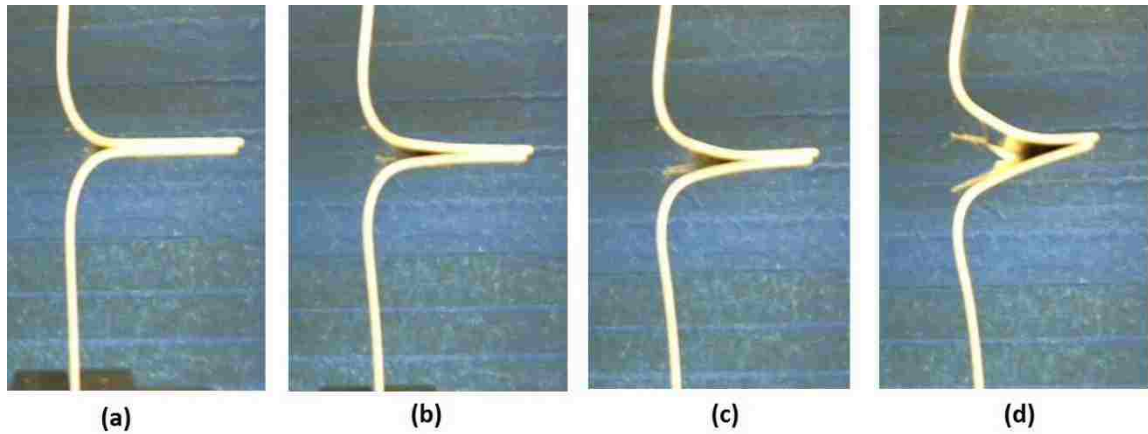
Tensile test of a 1.3 mm thick welded coach joint, No adhesive; un-deformed shape (a), deformed shape before the nugget yielding (b), at maximum load (nugget yielding) (c) and during crack propagation, before final failure (d).
